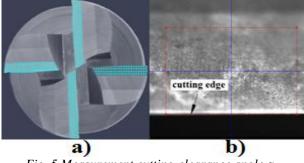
Measurement cutting-clearance angle α_1 a) measuring area, b) measuring field with aligned cutting edge
